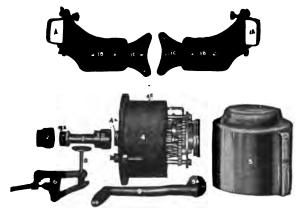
Assembly of Volkman mechanical starter. 10 post for releasing cable; 11, 12, lock nuts; 13, swivel on release lever; 14, release lever; 15, flange on spring case; 16, releasing cable; 17, spring holding clutch; 18, flange for brass sleeve.
